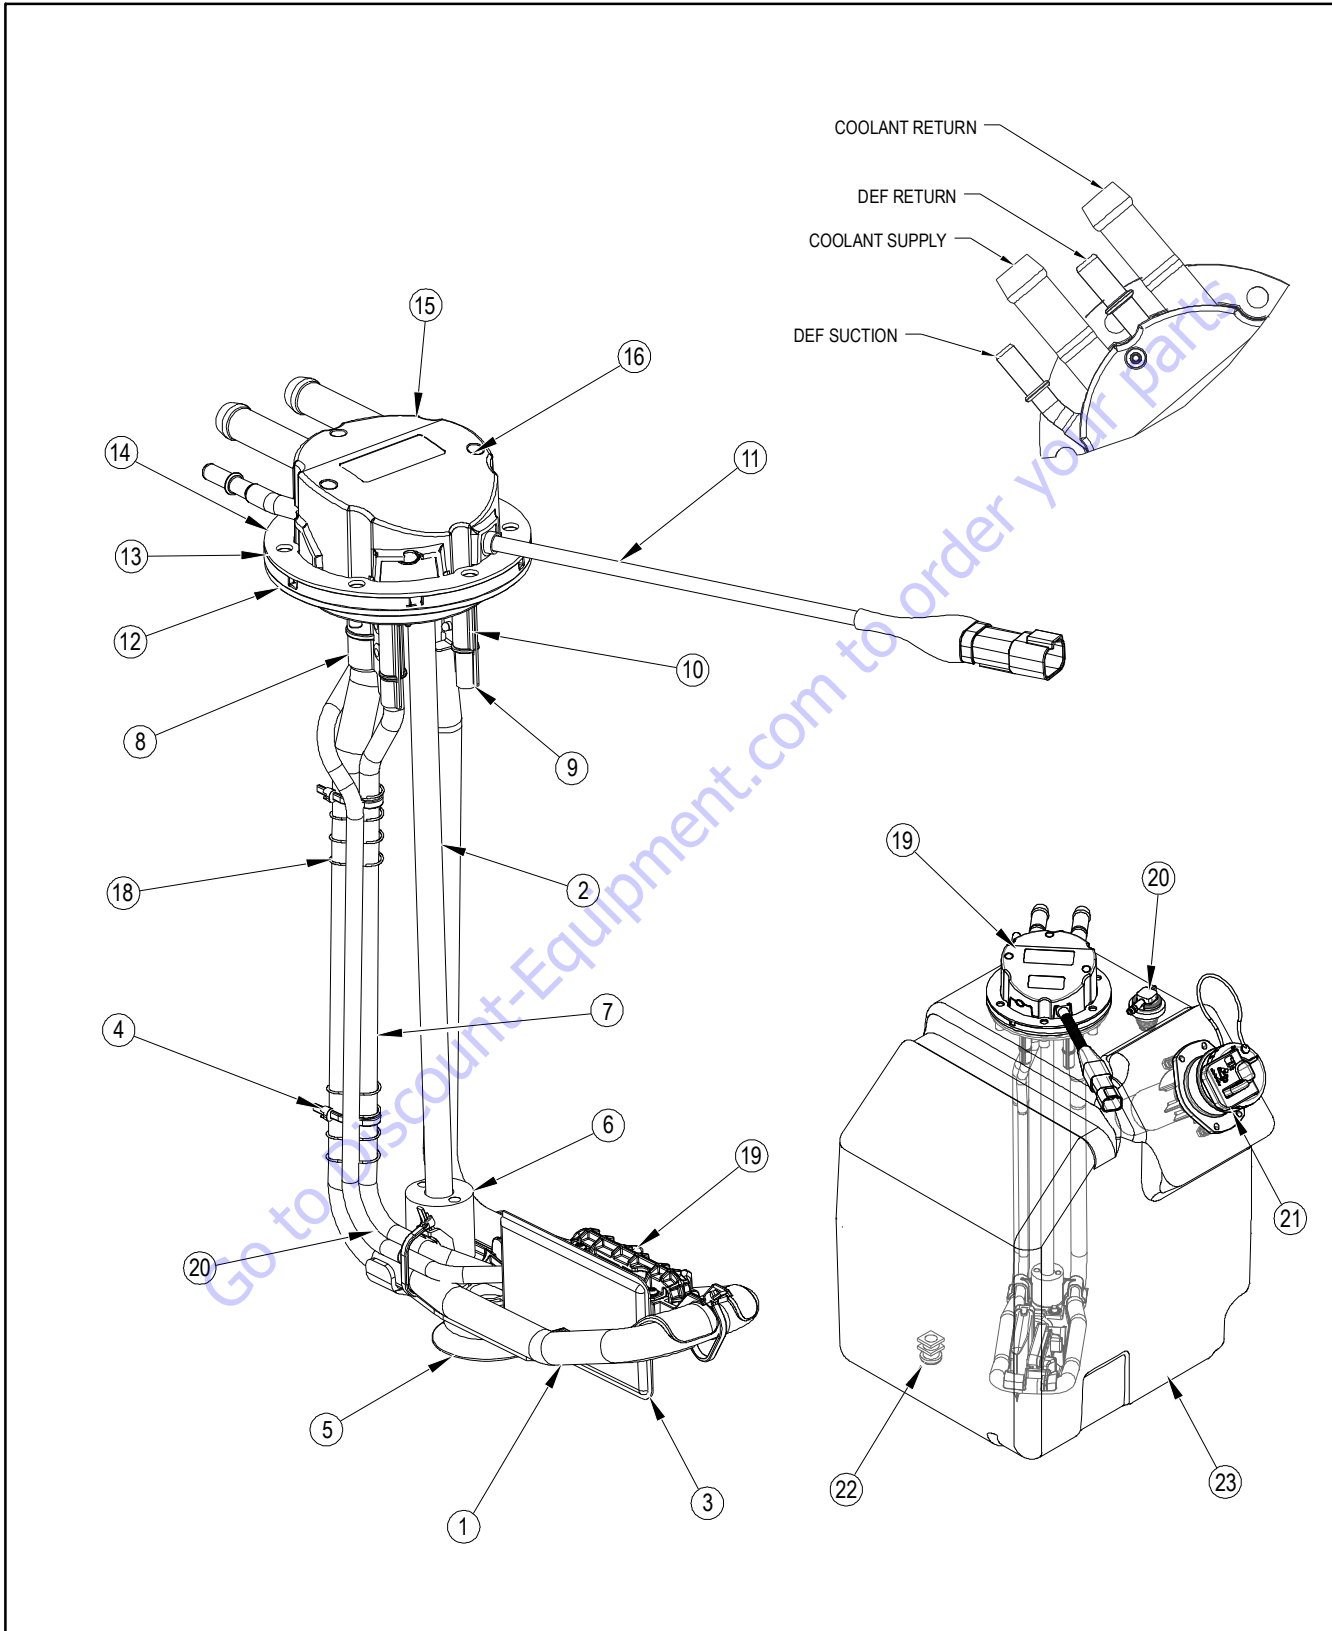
Diesel Exhaust Fluid (DEF) Tank - Sheet 1 of 2
